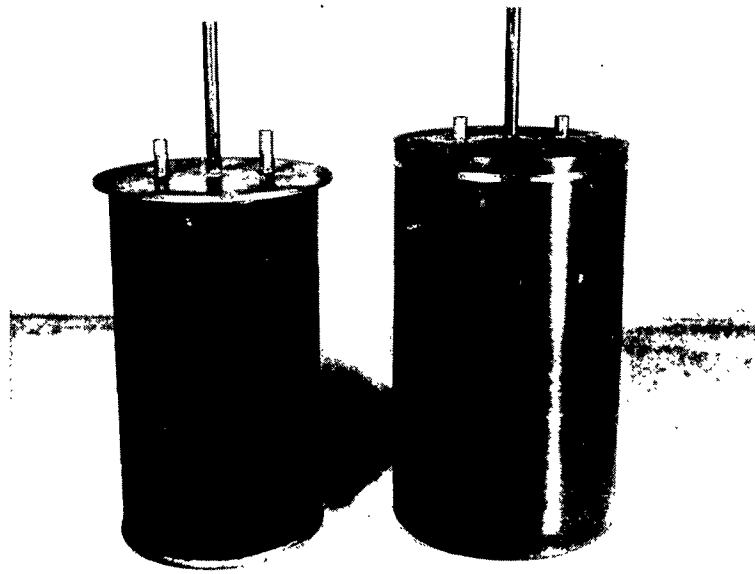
Steel Mandrel and Completed Wax Form. Photograph courtesy of C. D. Babcock, Jr.
